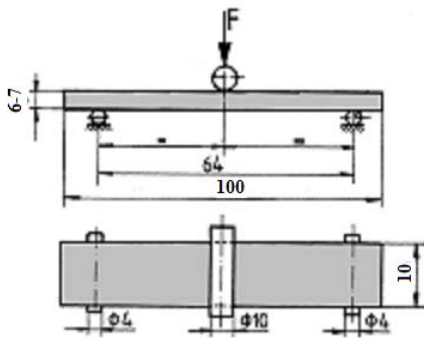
Dimensions of the specimen and scheme of loading for the bending test [9]
